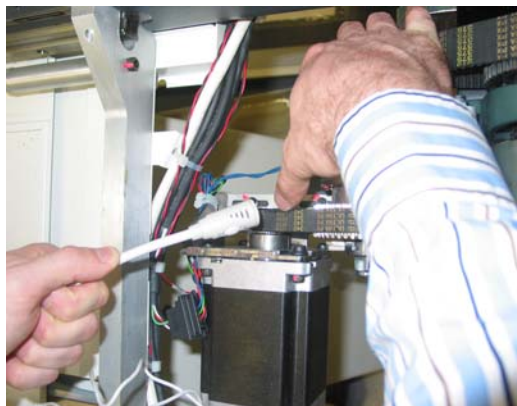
Pulley of the Cradle Motor Clutch Assembly
